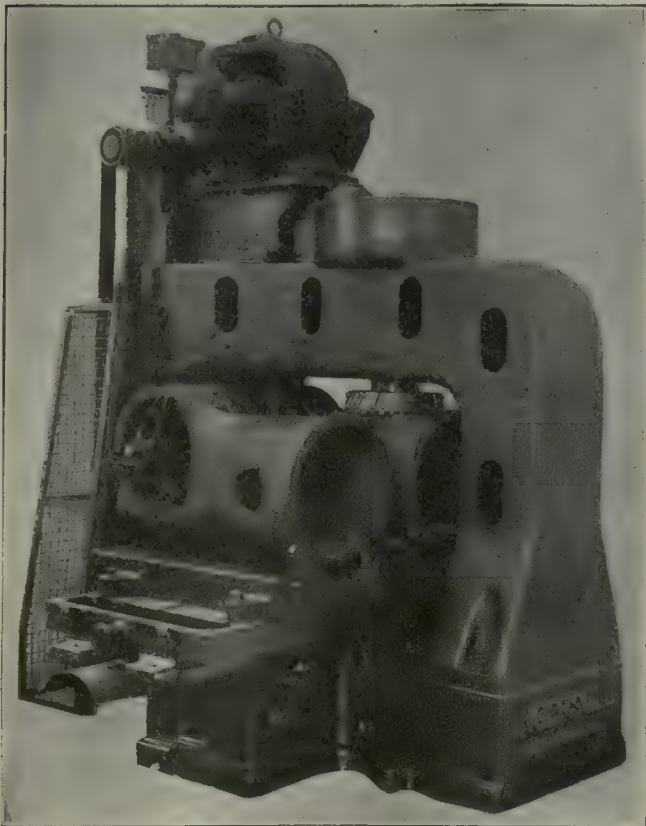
INGERSOLL RECIPROCATING-TABLE MILLING MACHINE FOR TRACTOR TRANSMISSION HOUSINGS
